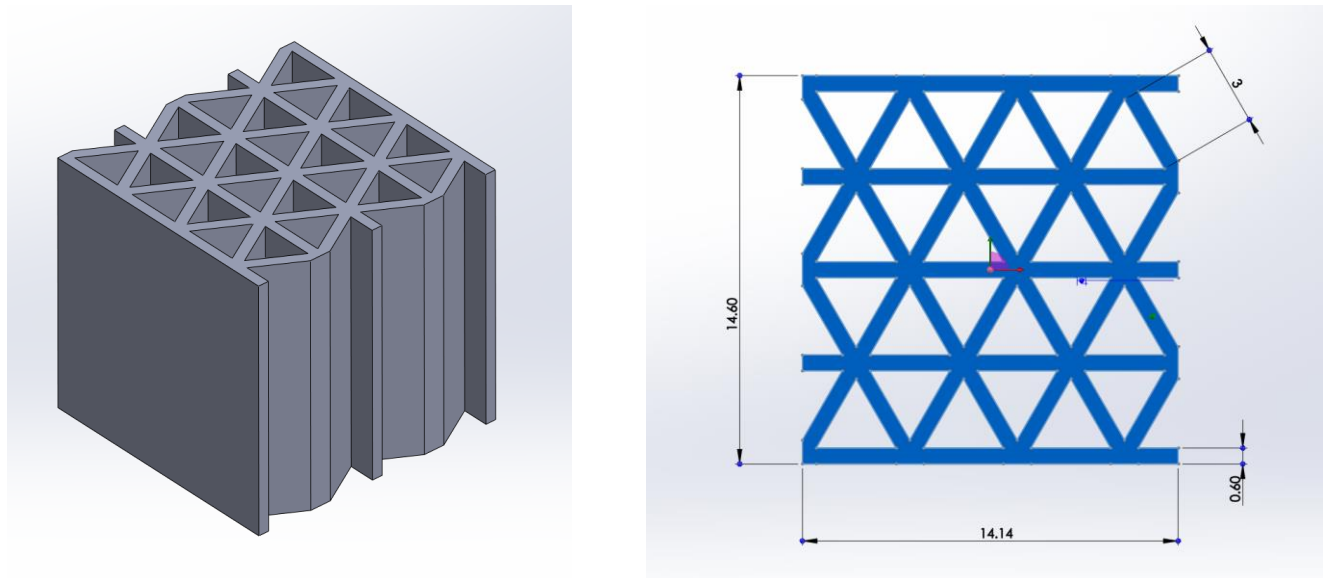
Model and dimensioned drawing of triangular honeycomb (Units: mm).
